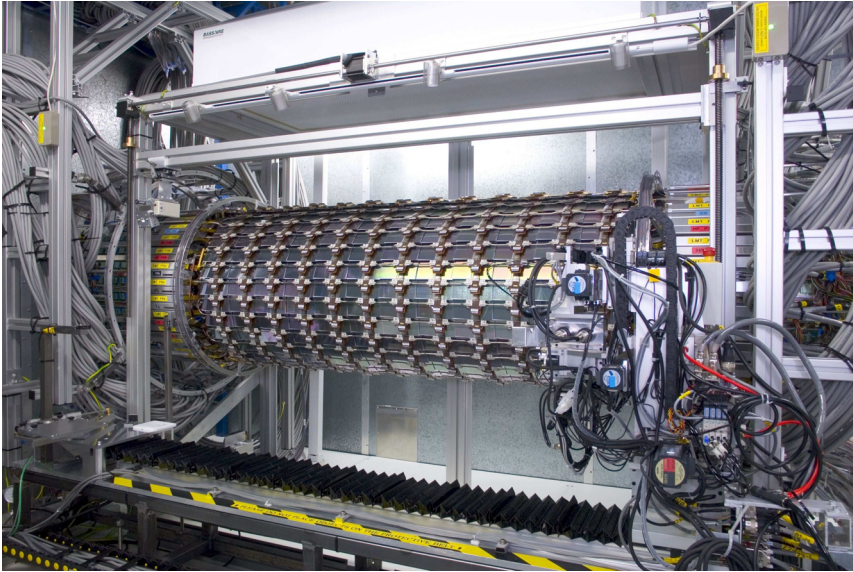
Barrel 3 in its mounting position in the Oxford macro-assembly cold room [115]. The mounting robot can be seen at the right side and runs horizontally on the rails at the bottom of the picture. On the very left and right sides are the support wheels and cables to the control room.
